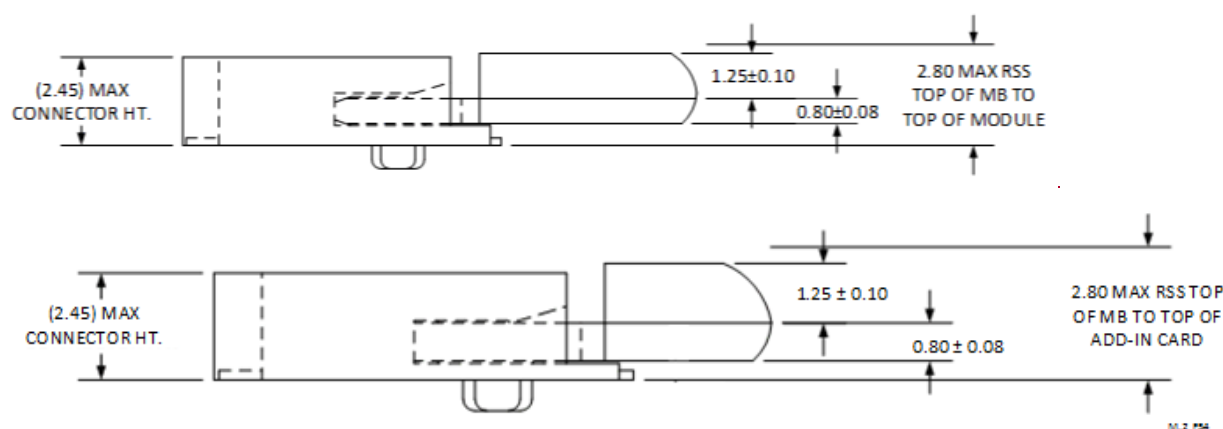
H2.5-S2 - Stack-up Top Mount Single-sided Add-in Card for 1.35 Maximum Top-side Component Height and with Higher Clearance above Motherboard
